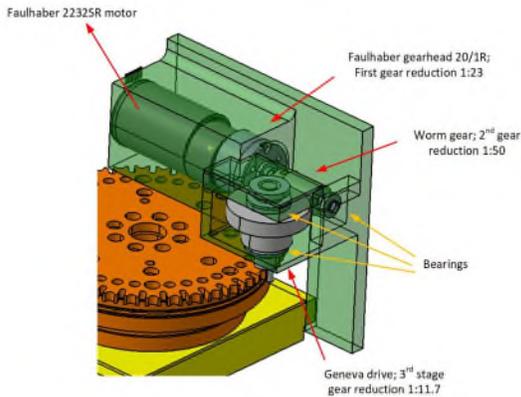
BoB motor subsystem to drive the Geneva gear mechanism.
